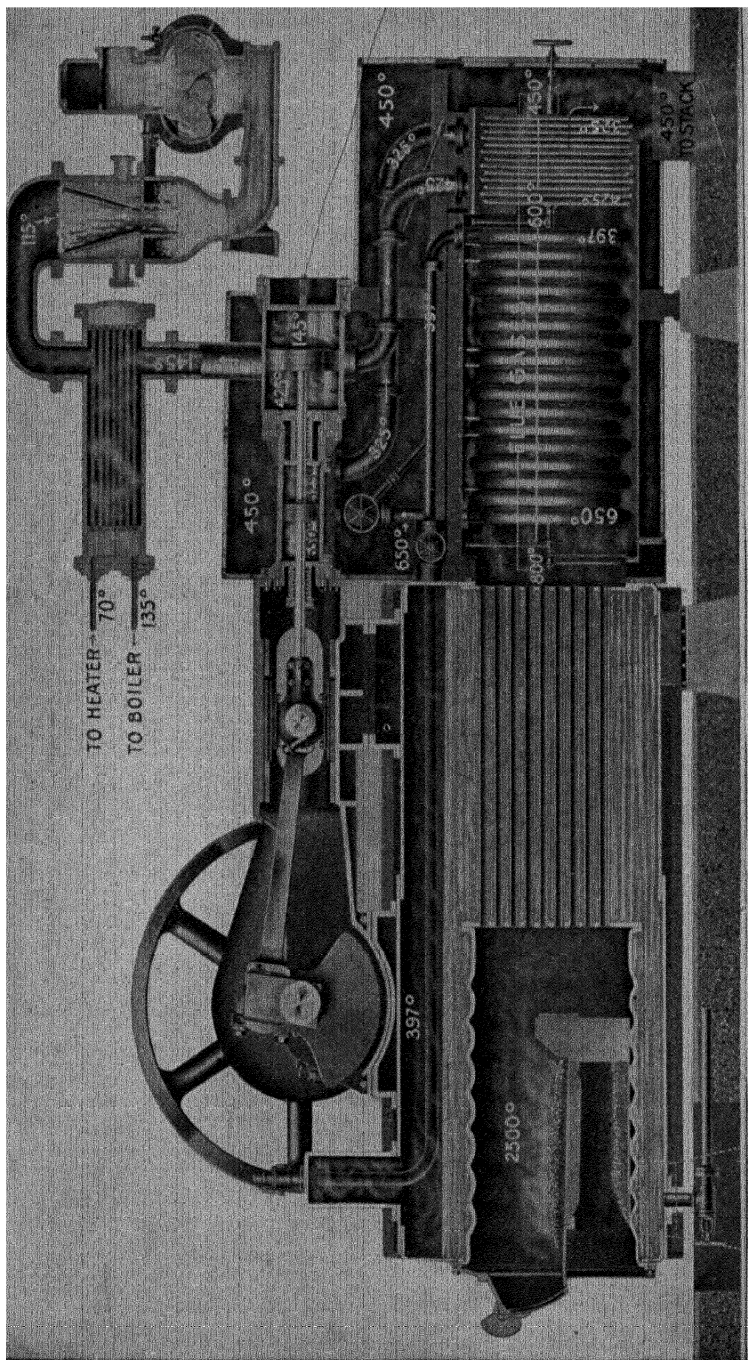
Section of Buckeye portable Showing Temperatures in Different Parts of the Power Units
